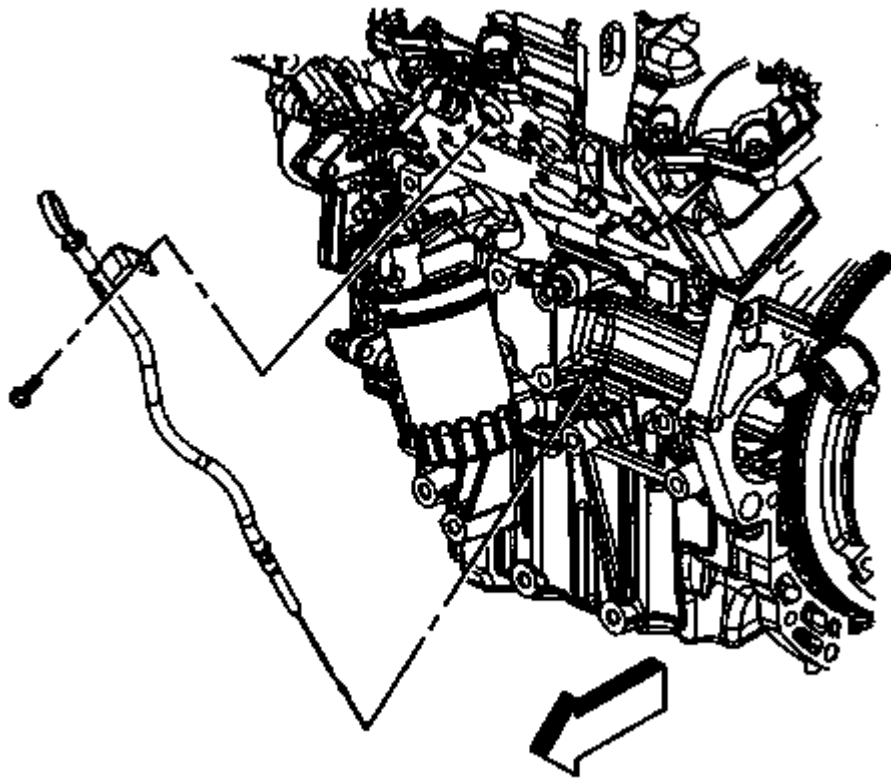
Identifying Oil Level Indicator Tube & Bolt
